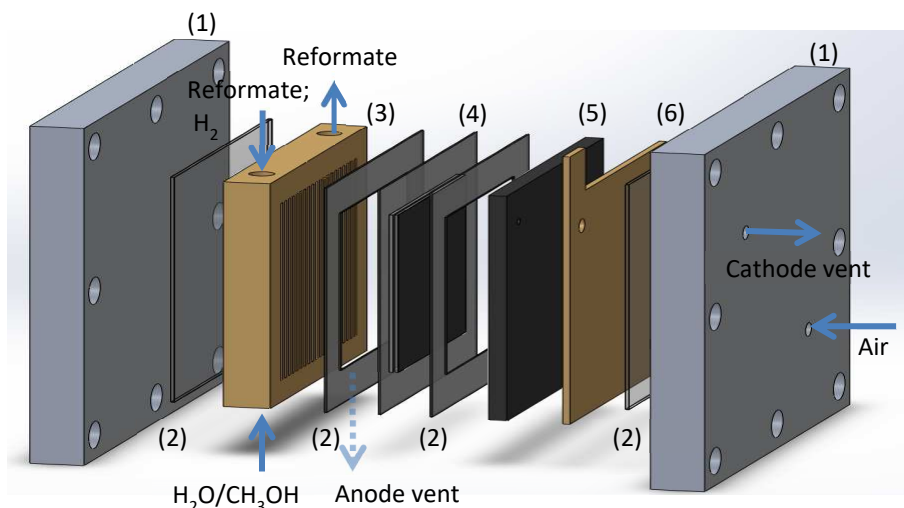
Assembly scheme of the integrated unit (MSR-C/HT-PEMFC); two metal end-plates frames (1), gasket (2), aluminium gold coated bipolar plate (3), MEA (4), graphite composite bipolar plate (5) and current collector (6).
